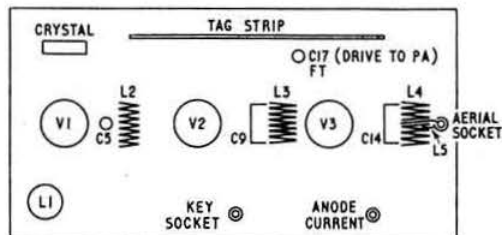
Suggested mechanical layout for the "Quickstarter Three" reproduced about half size. If double tuned circuits are preferred they will occupy a further two inches of chassis length.
